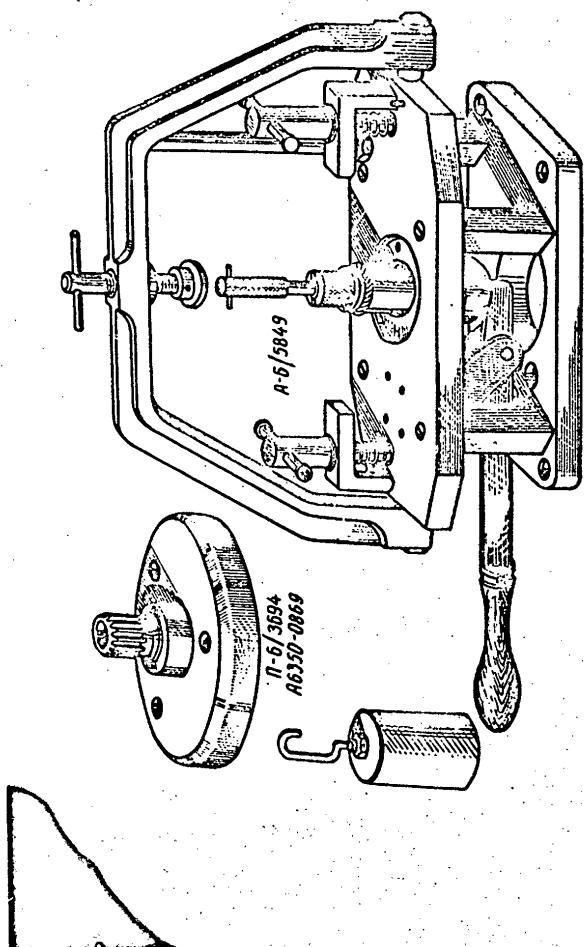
FIXTURES FOR SUPERCHARGER ASSEMBLY
